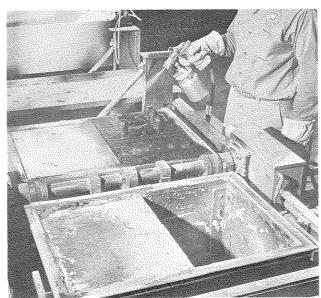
The pattern is heated and then clamped in the right half of the shell making machine as shown. The dump box on the left side of the machine contains the zircon sand mixed with a resin binder from which the shell will be made. The operator is spraying the pattern with a silicone compound to prevent the mold material from sticking.
